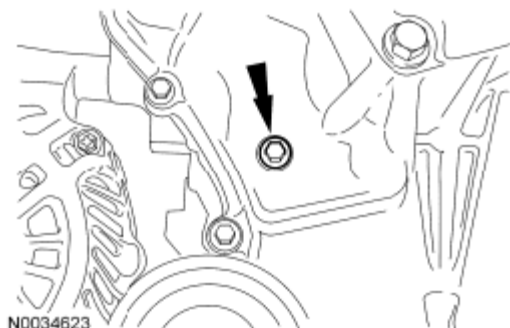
Locating Upper Front Cover Timing Hole Plug
